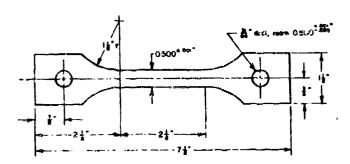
SHEET AND THIN-PLATE TENSILE SPECIMEN
